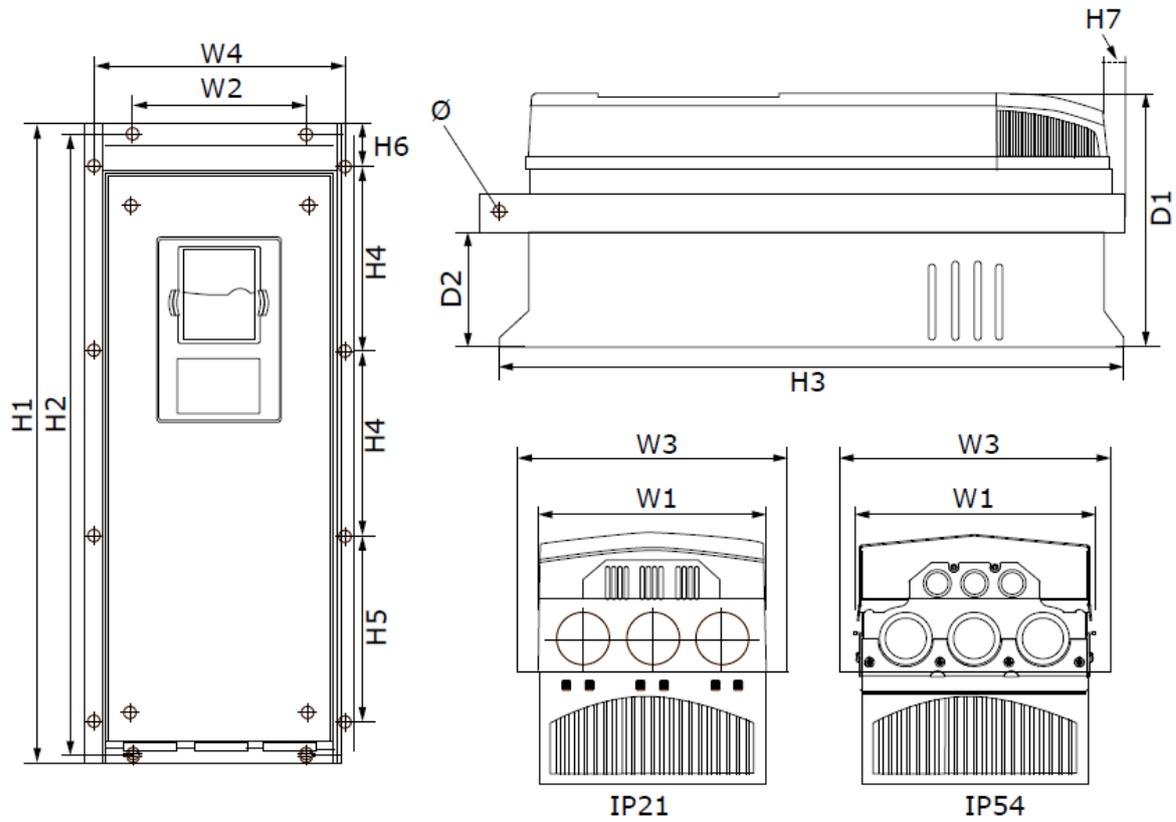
The Dimensions of the Opening and Drive Outline with Flange, FR4 to FR6
